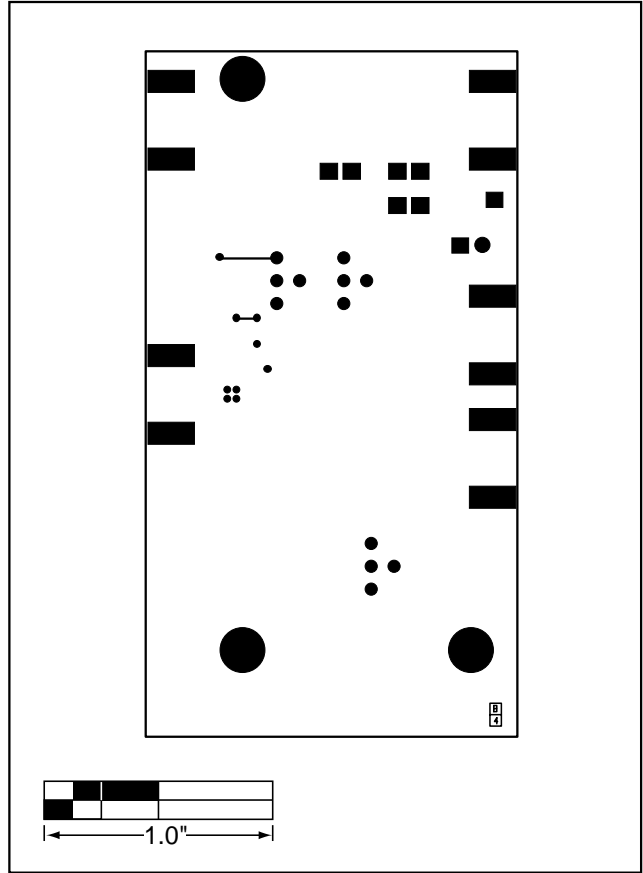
MAX3866 EV Kit PC Board Layout—Solder Side
